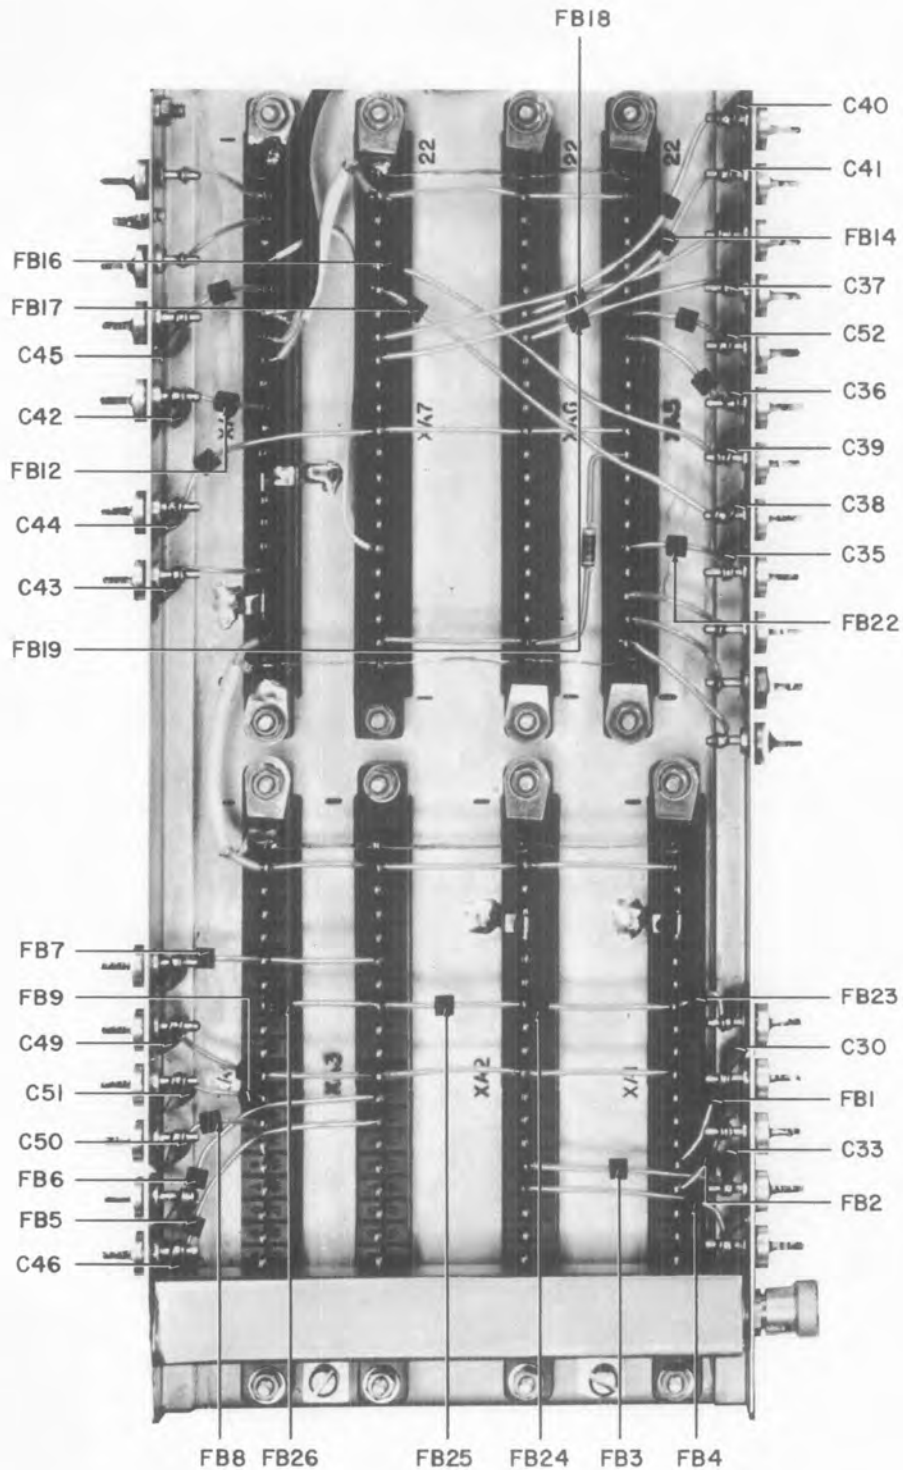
Type 72311 IF Amplifier Assembly (A2), Bottom View, Location of Components
